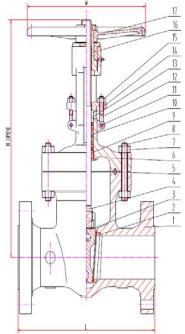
600 LB. 900 LB. 1500LB. 2500LB GATE VALVE STRUTURE
